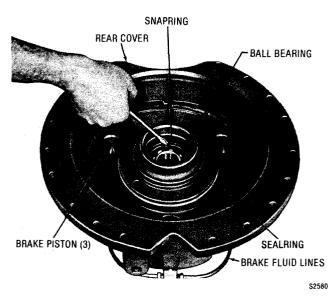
Removing snapring from rear bearing bore (TTB)
